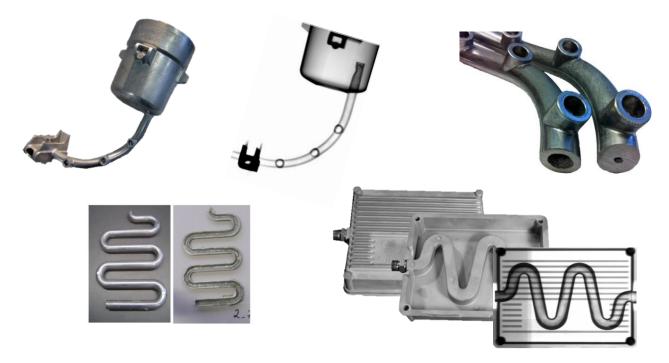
Examples of die castings produced in Aalen by gas injection using the cold chamber casting technology
